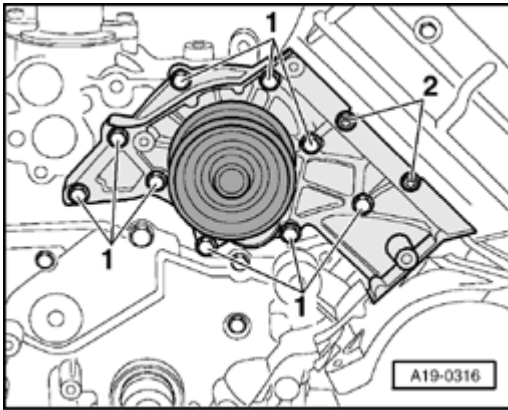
Removing Nuts For Toothed Belt Guard At Left Rear, Bolts For Coolant Pump And Coolant Pump
